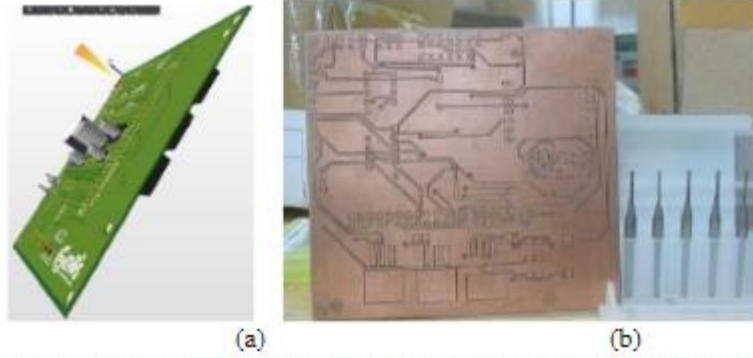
(a) 3D PCB Design Presentation (b) PCB of adaptor board.
